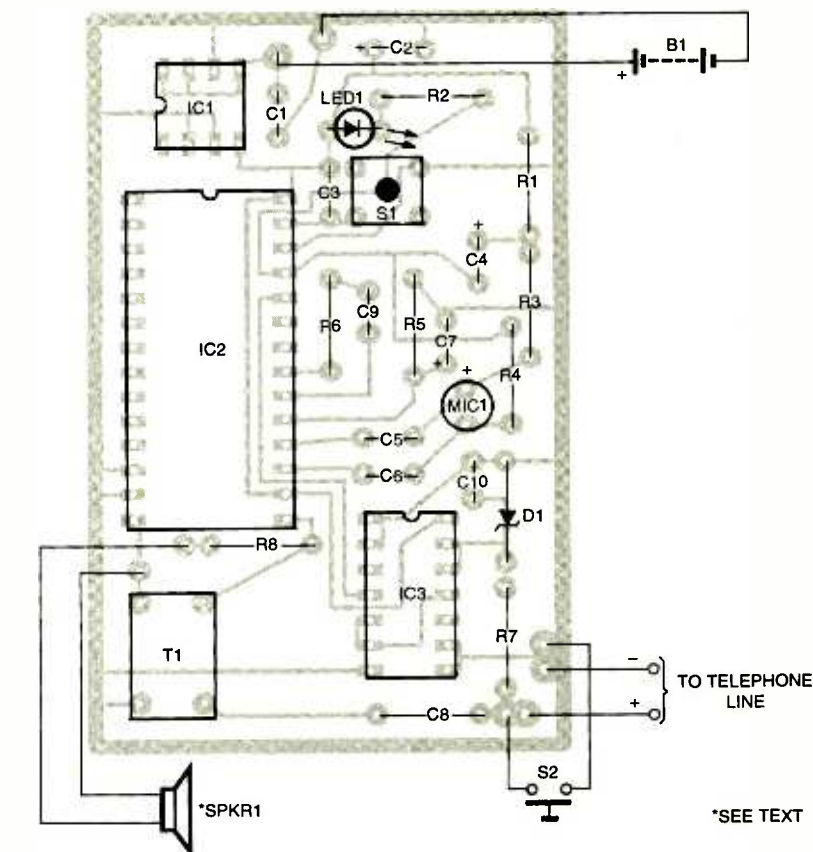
Assemble the Telephone Hang Up Module's printed-circuit board guided by this parts-placement diagram.
